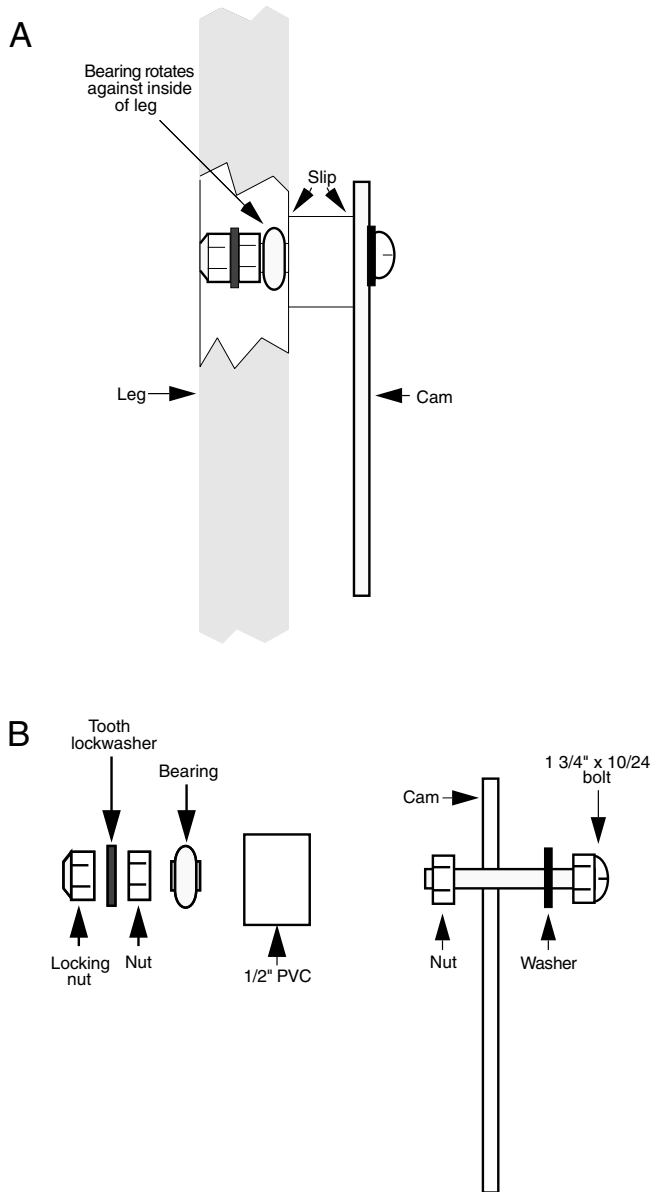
Hardware detail for the leg cam. *a.* Complete cam and leg; *b.* Exploded view. Note that two of the legs use a 2-inch piece of PVC and a 3-inch bolt.
